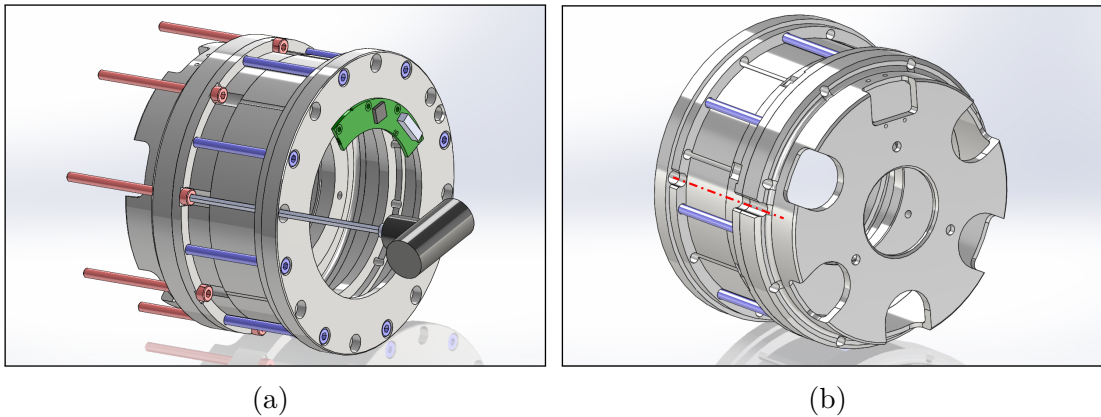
(a) Detail of the drive casing: blue-highlighted screws are responsible for casing sub-parts assembling; red-highlighted screws, fastened through dedicated holes, allow to secure the drive inside the robot housing. (b) Rear-view detail of casing; unsymmetrical hole for encoder cable passage is highlighted as a red line.
